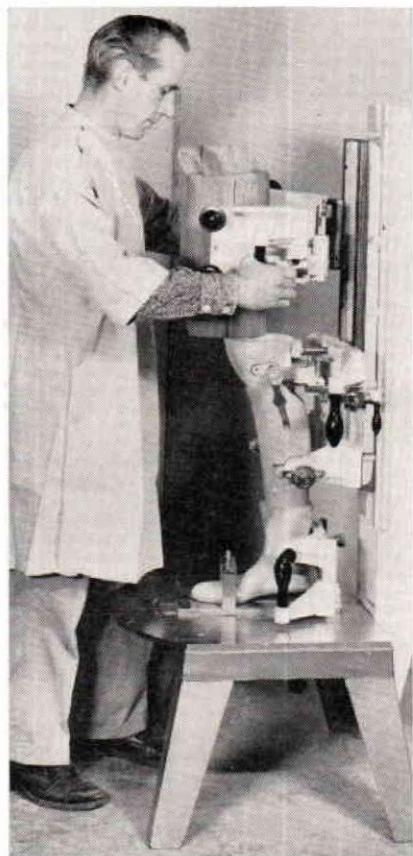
Prosthetist Removing Socket Bracket from Transfer Jig.
